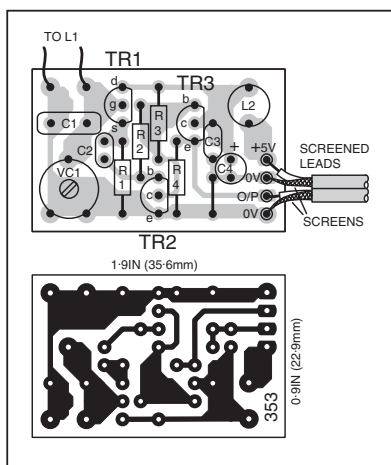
Printed circuit board component layout, wiring and full-size copper foil master pattern for the Receiver.
